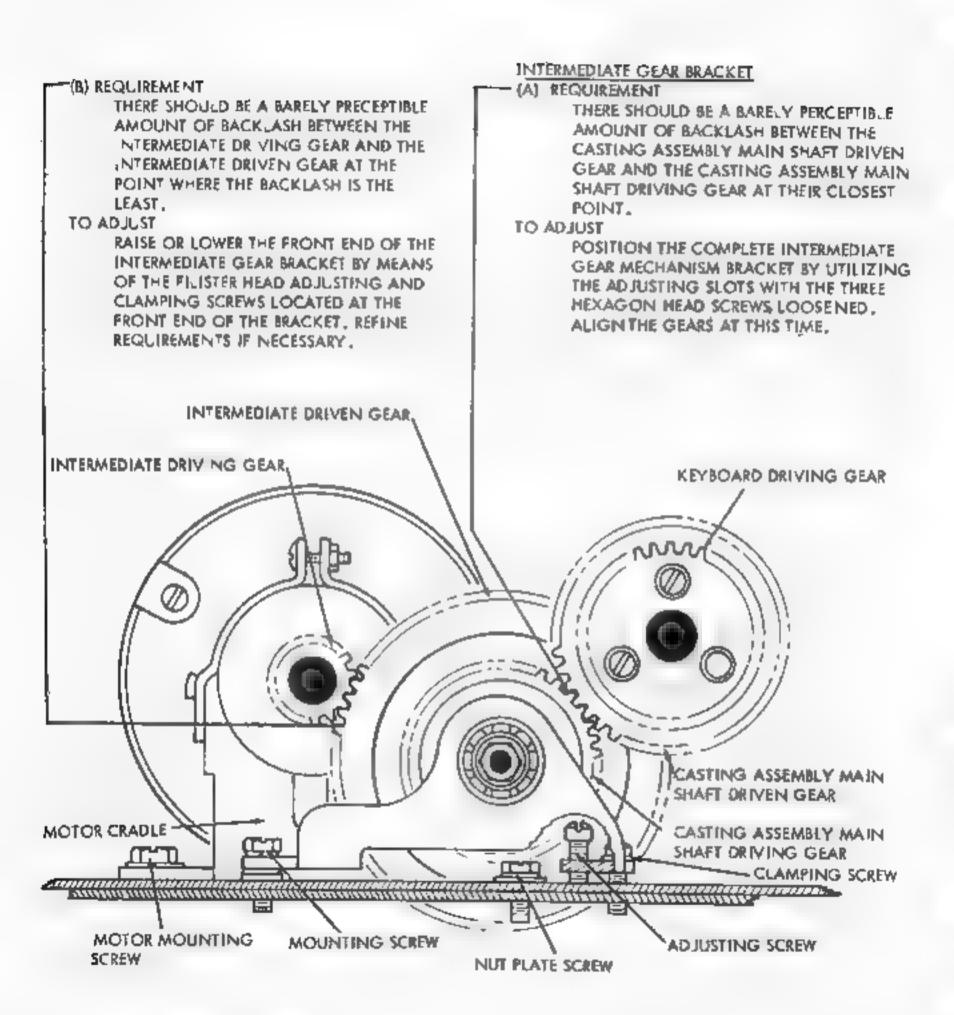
KEYBOARD BASE, MOTOR AND CASTING ASSEMBLY MAIN SHAFT GEARING
